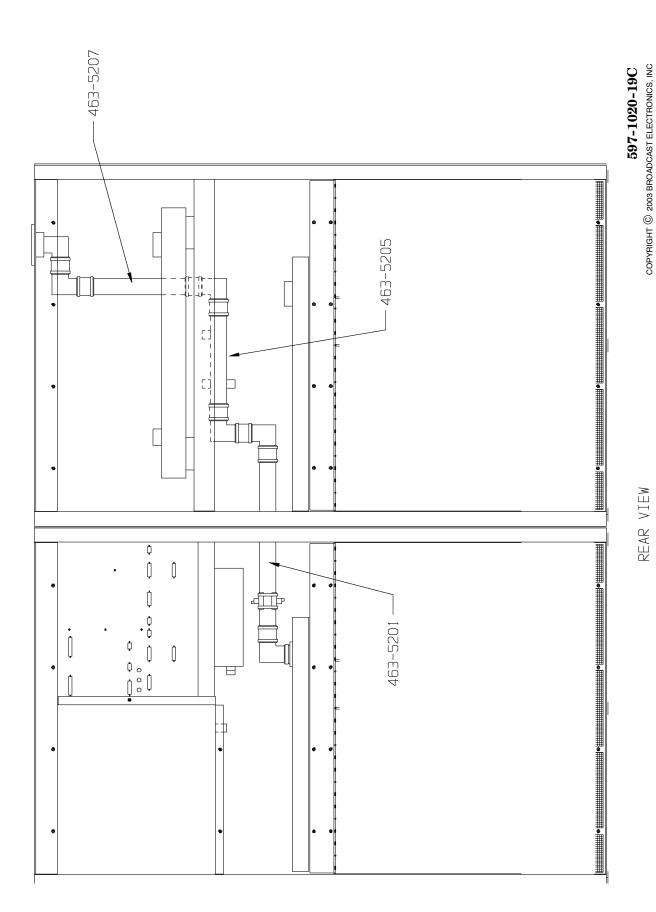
INSTRUCTIONS TO BYPASS CONTROL OR AUXILIARY CABINET 10 KW COMBINER (SHEET 3 OF 4)
